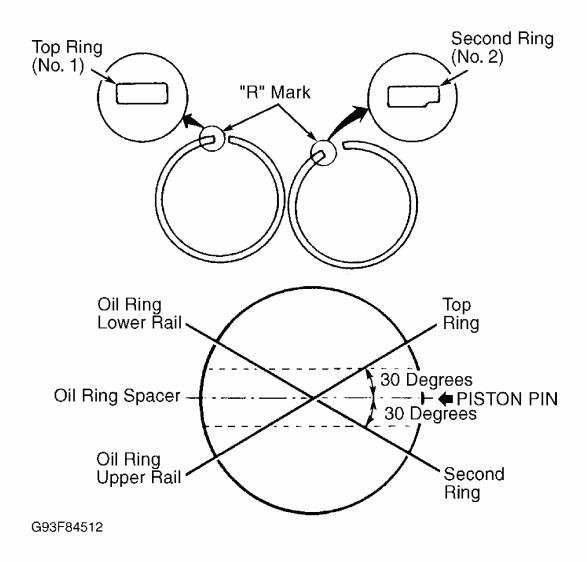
Positioning Piston Ring End Gaps Courtesy of MAZDA MOTORS CORP.
